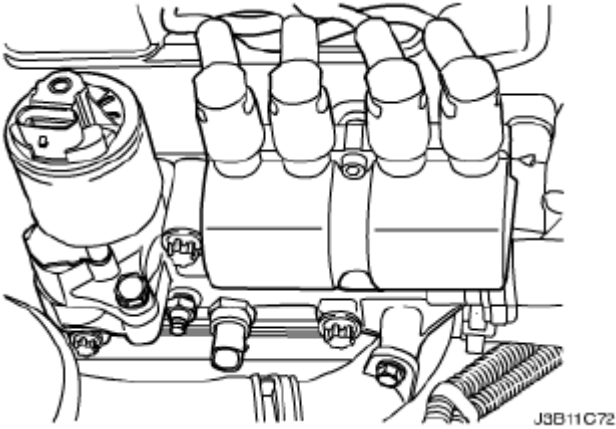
Identifying DIS Ignition Coil And EGR Mounting Bracket And Ignition Wires
